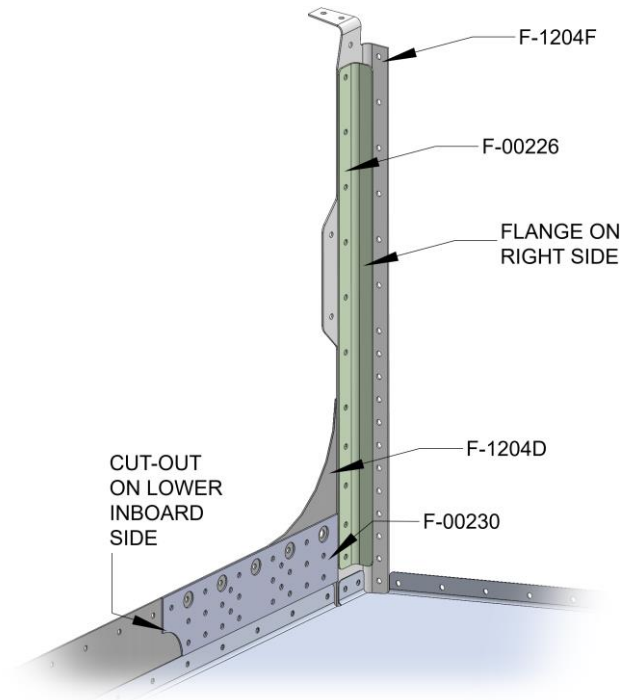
F-00226 REINFORCEMENT ANGLE - INSTALLATION, RIGHT SIDE
